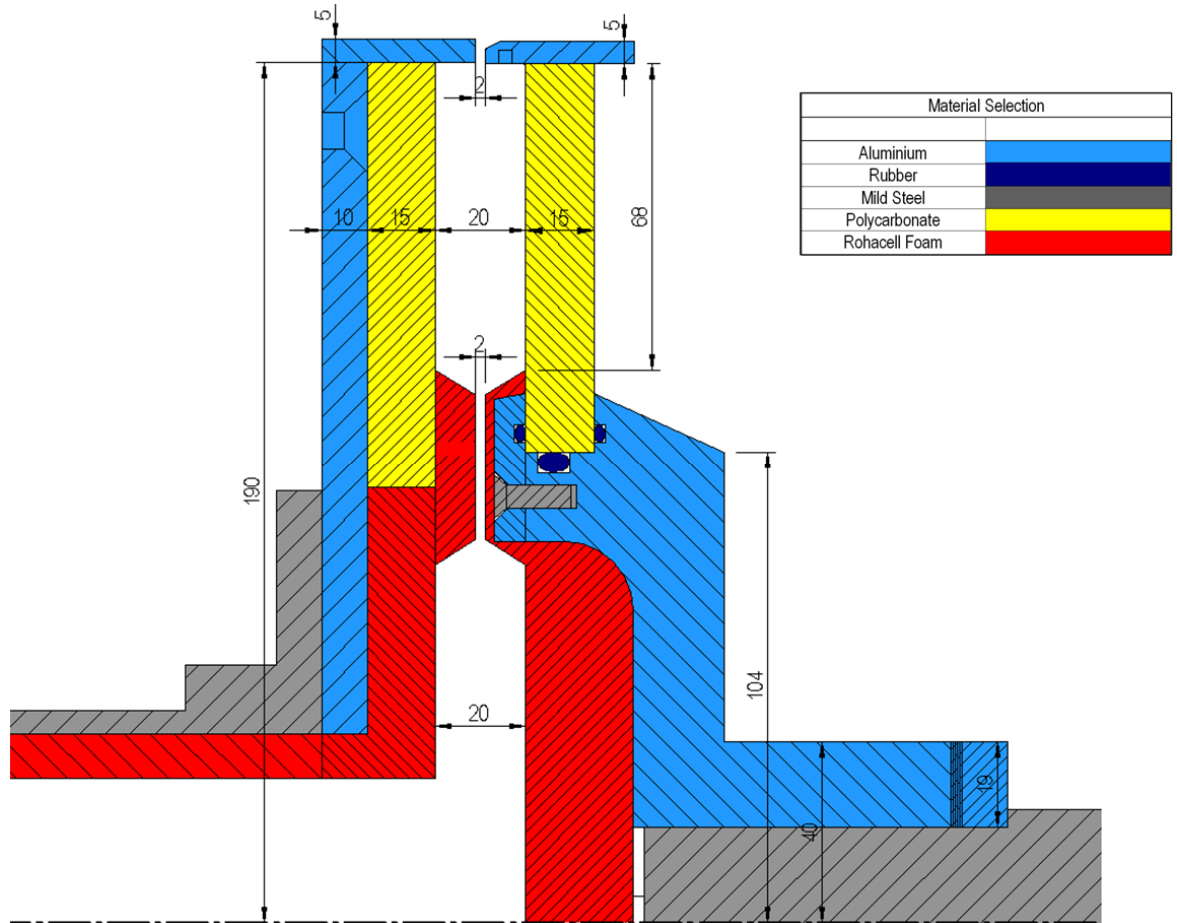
Dimensioned rotor-stator setup (all dimensions in mm)
